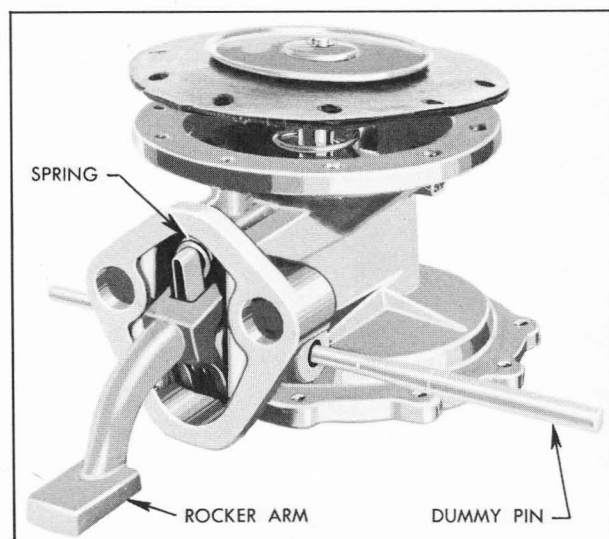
Rocker Arm and Links Held in Body by Dummy Pin
